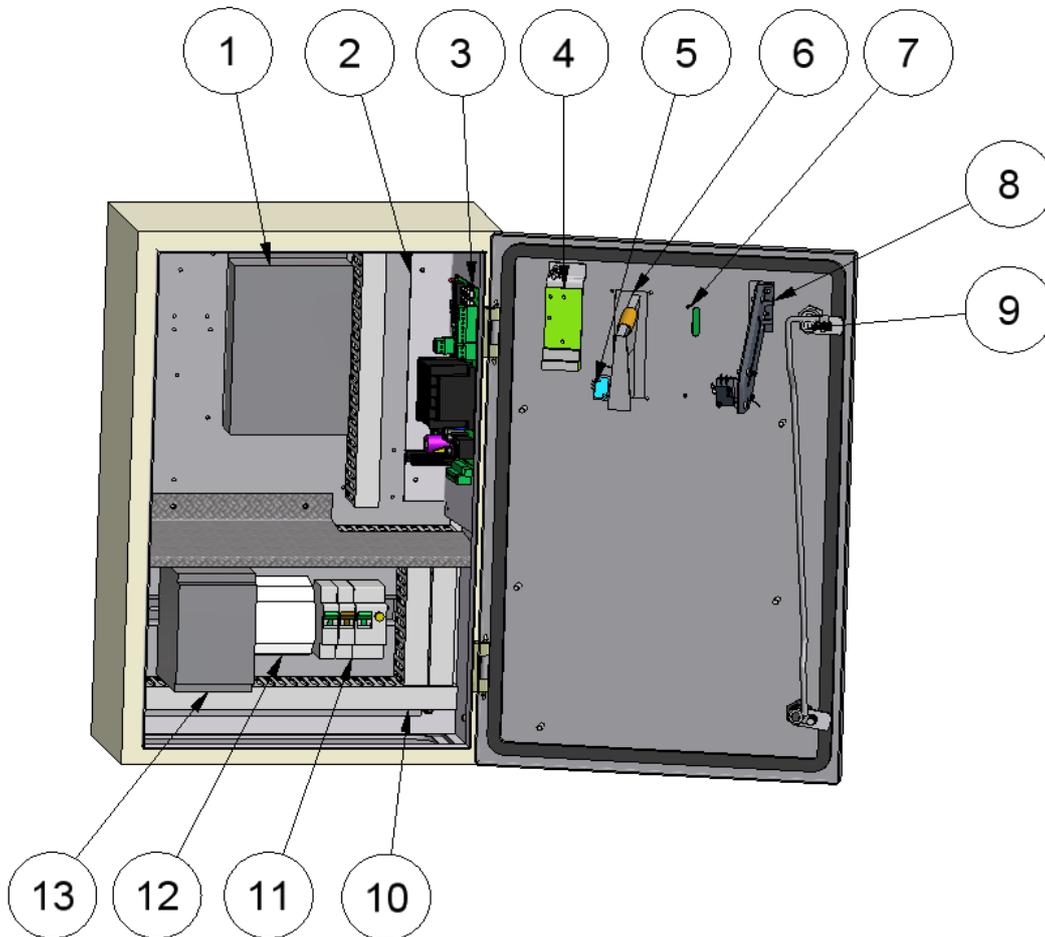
Inside the control box, EMC-30 card reader and mechanical coin control
